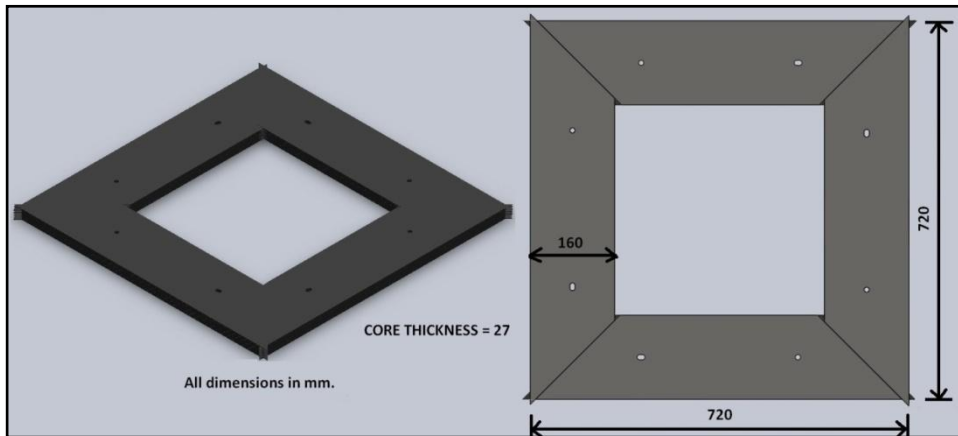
Single phase core built with a single 160mm wide packet.
